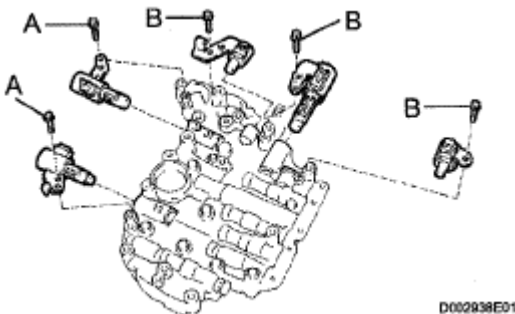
Identifying Shift Solenoid Valves With 5 Bolts
